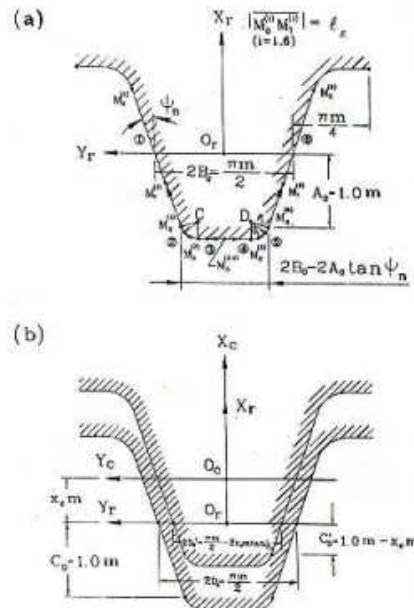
Normal Section of the Rack Cutter Σ_G for Generating the Driven Elliptical Gear (A) Standard Cutter (B) Shifted Cutter
